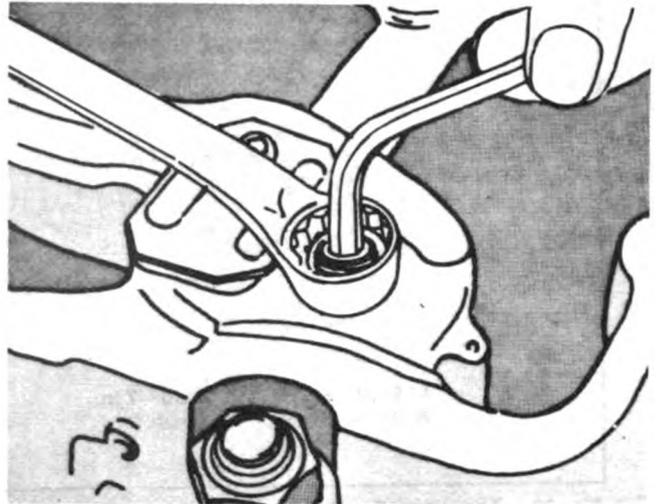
Adjust The Slave Piston In The Models 25C And 44.
